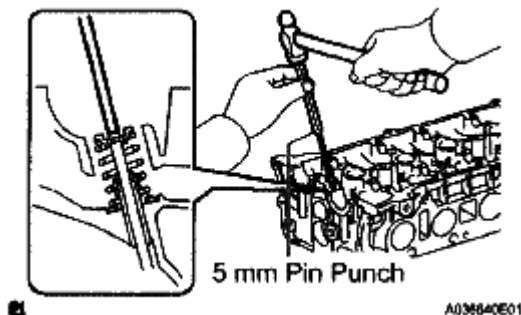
Tapping Valve Stem Tip To Ensure Proper Fit
